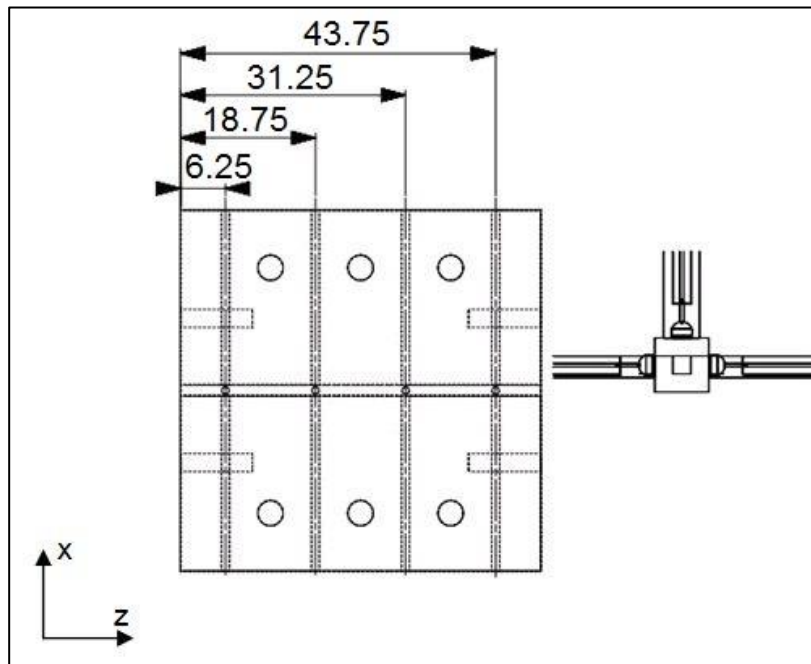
Drawing of the thermocouple placement onto the stainless steel test section
